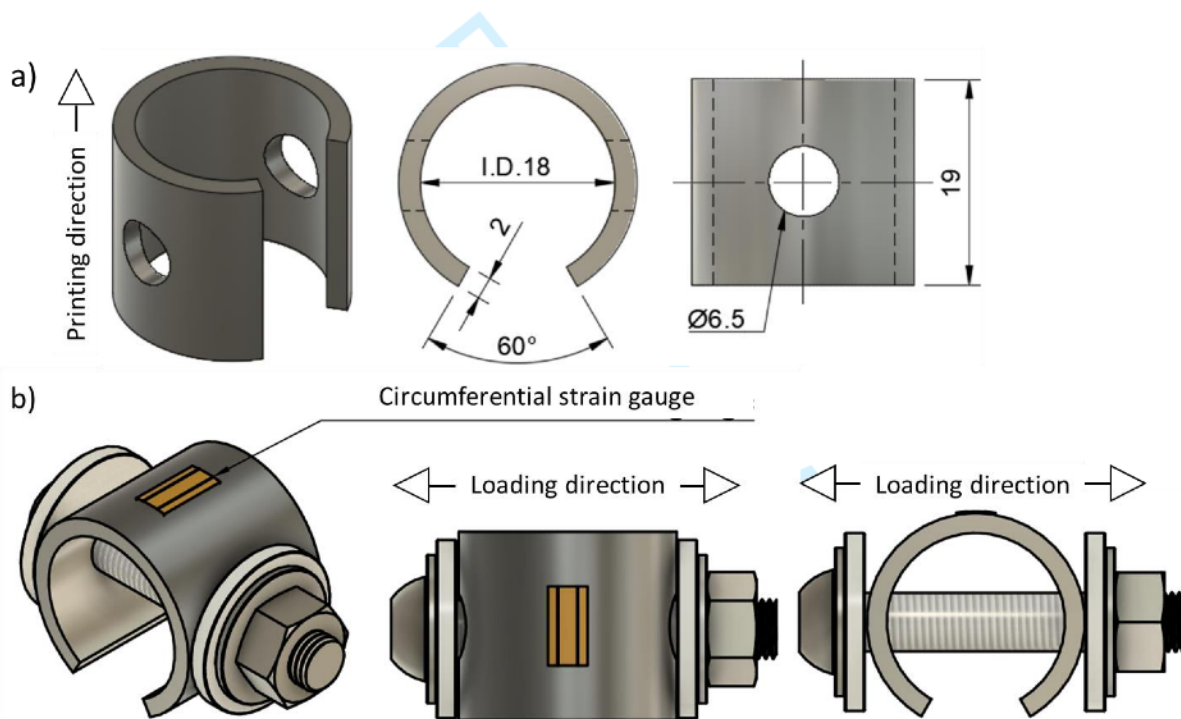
Custom C-ring specimen used to investigate the SCC susceptibility of LPBF SS316L and wrought SS316L. a) Drawings and dimensions in mm, and b) schematics of the constant-strain assembly according to ASTM G38.
